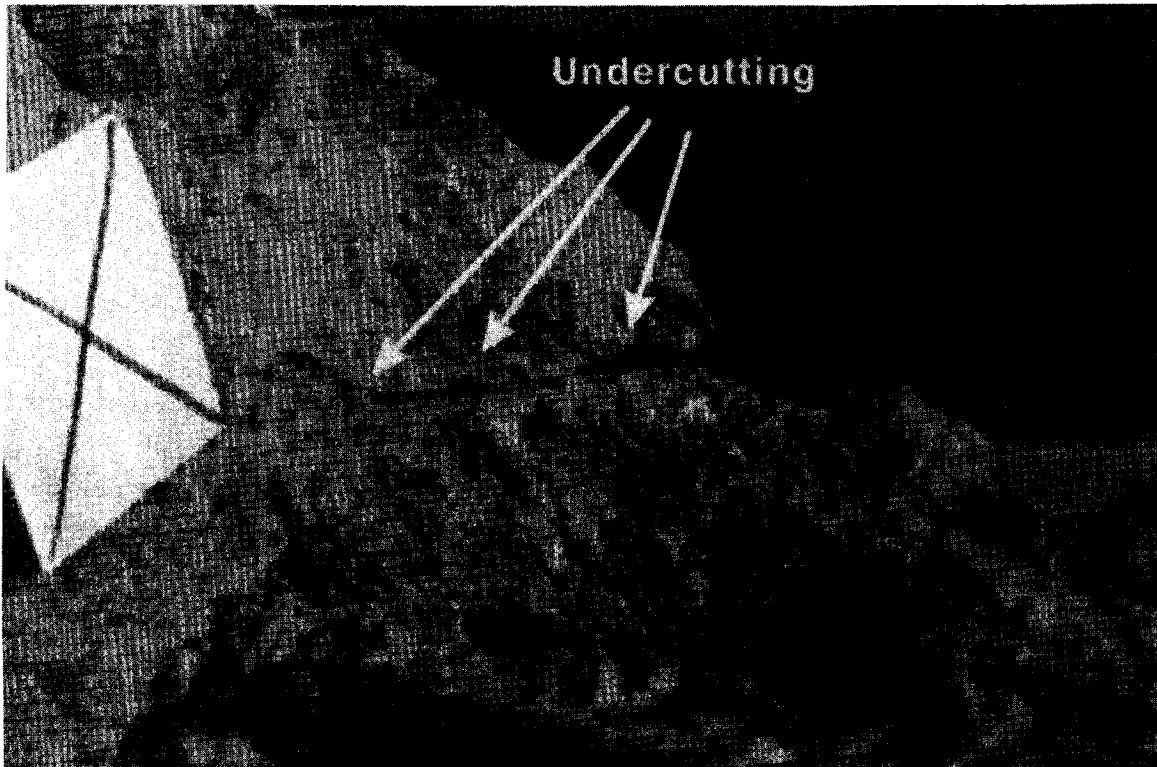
A close up view of the area of undercutting on the upper landing plate weld adjacent to the hull plating at left. Photograph taken prior to cutting or Endox cleaning.
